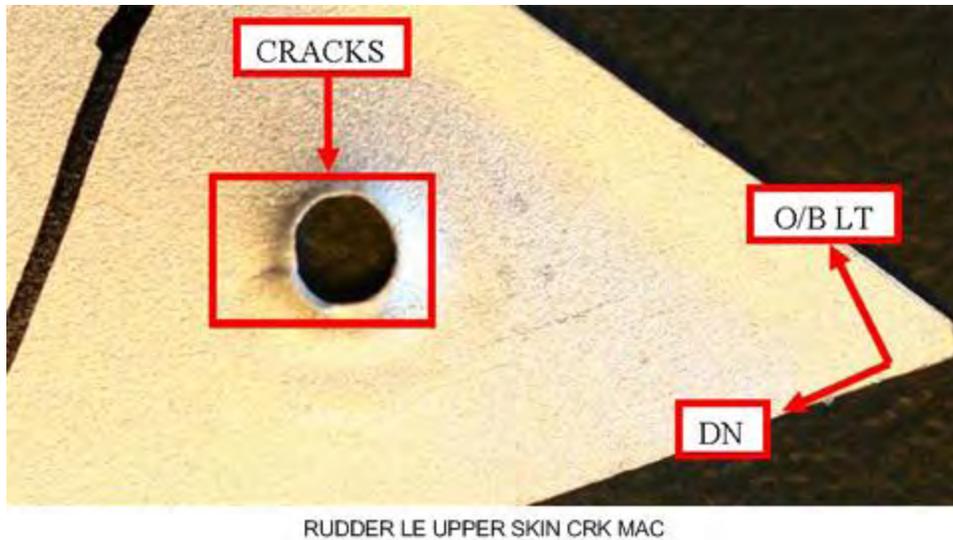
Macroscopic View of Crack on the Rudder Leading-Edge Upper Skin WL 96
